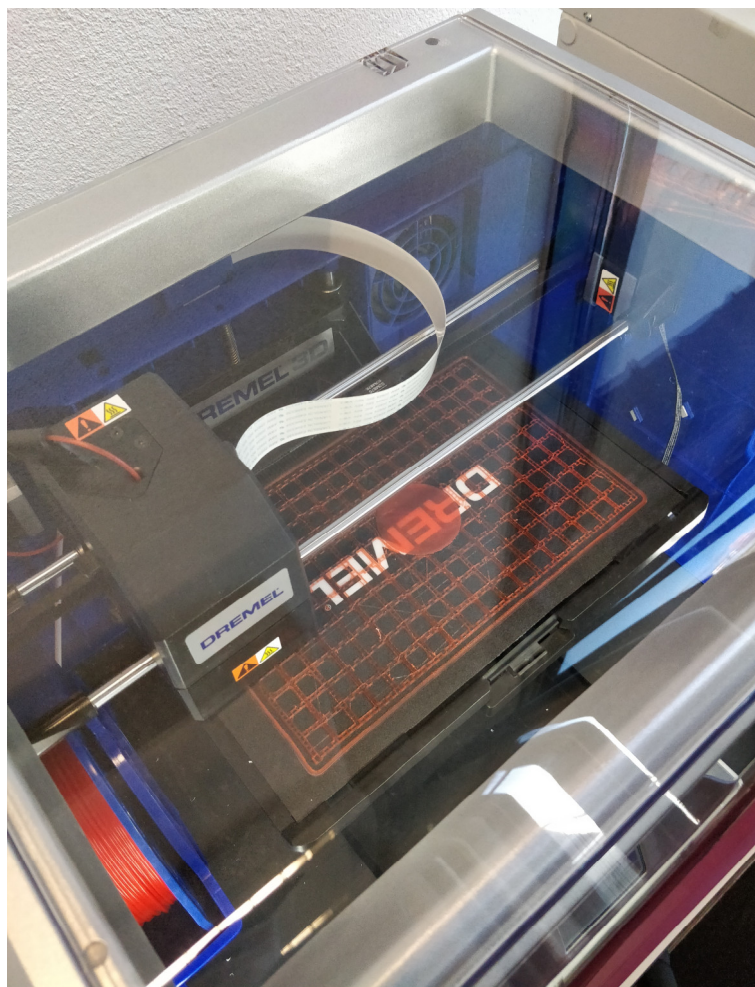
Dremel 3D40 printer used to produce moulds of the scour hole.
